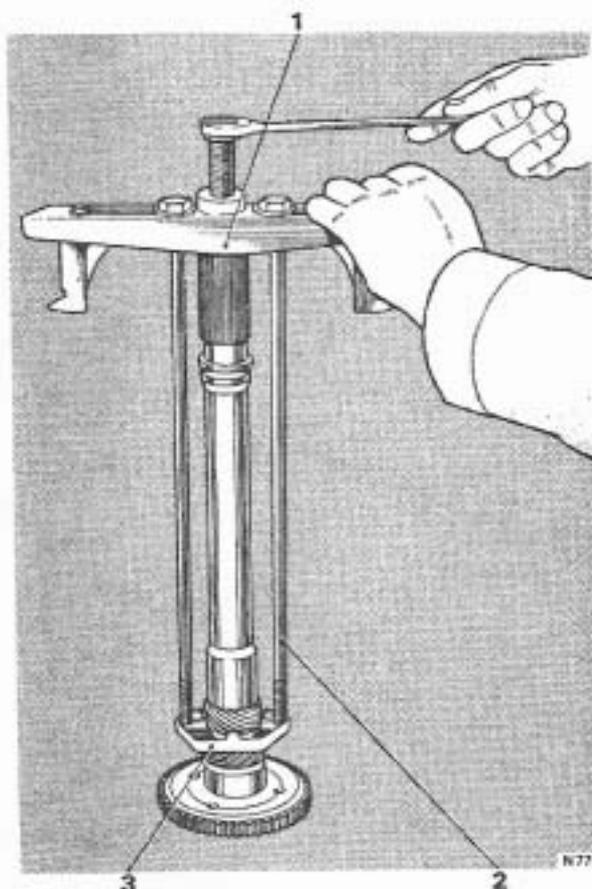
REMOVING A STEEL SPEEDOMETER DRIVE GEAR
